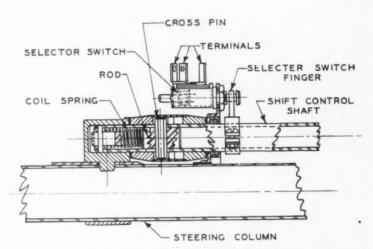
Longitudinal sectional drawing of the Randol shift actuator and selector switch.
